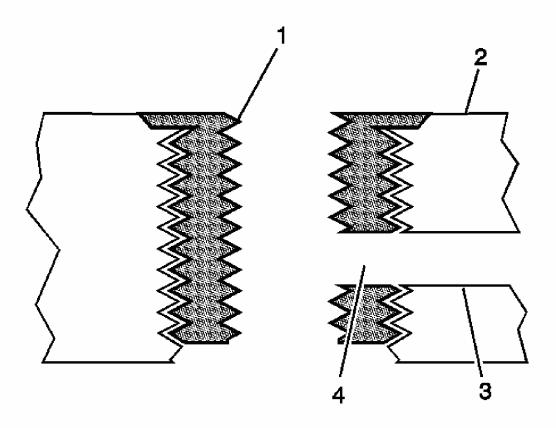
View Of Restricted Engine Coolant Passages - Standard Thread Repair Courtesy of GENERAL MOTORS CORP.
